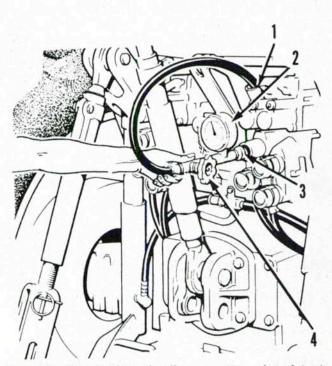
To check and adjust remote valve detent pressure, connect a flow meter or a pressure gage (2) with a load valve (4) to remote coupler (3). Return oil can be directed into filler tube (1).
